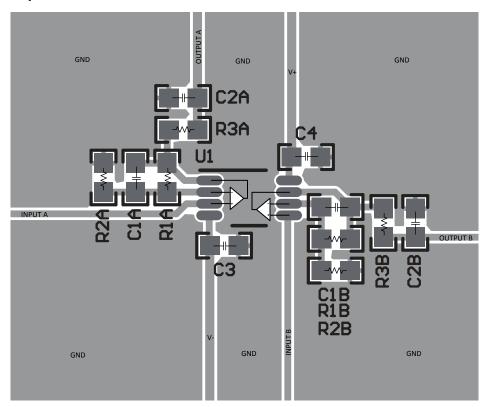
Example Layout for VSSOP-8 (DGK) Package
